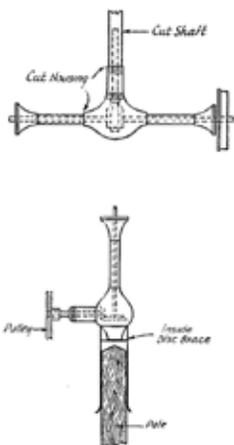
The rotary mount for the antenna cradle is made by cutting an old Model T Ford rear end as shown in the top drawing and welding it in a section of pipe as shown in the lower drawing. The pipe is then fitted over the pole and fastened with lag screws.
